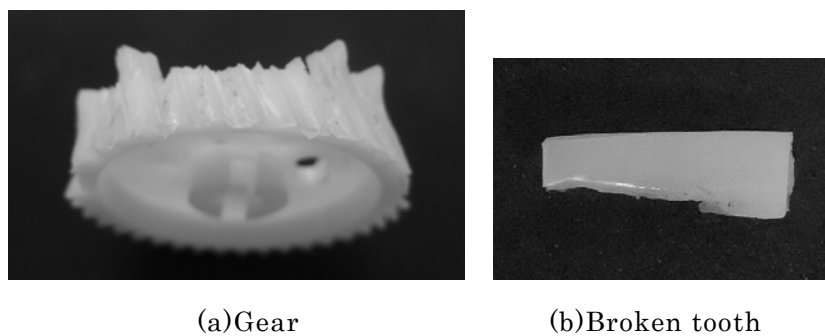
Damaged gear of grease lubricated plastic crossed helical gears
